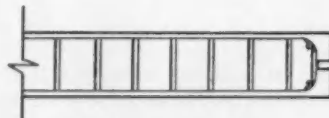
Chem-Milled facing; this design requires close tolerances
